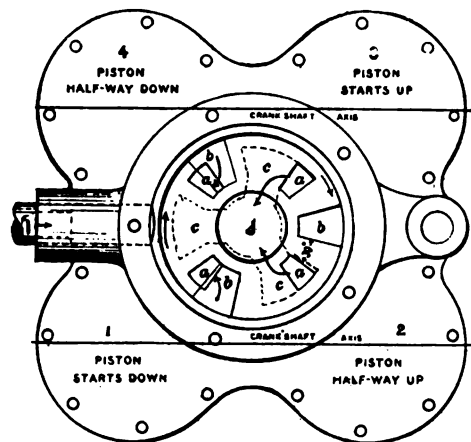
PLAN OF VALVE IN READING STEAM ENGINE.
